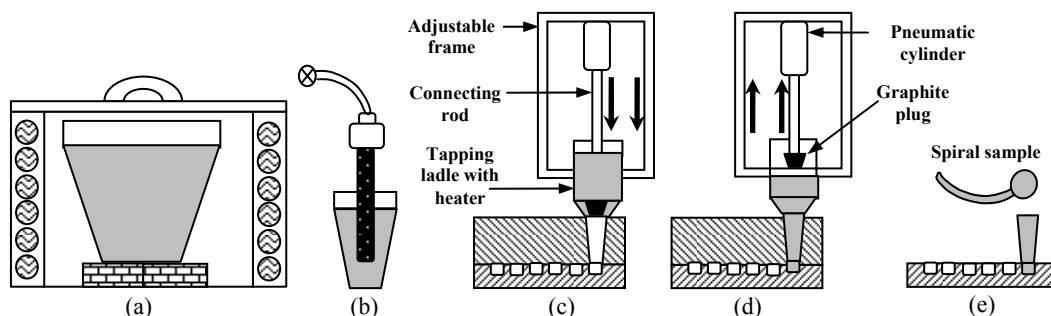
Schematic diagram of the spiral fluidity casting process (a) Melting, (b) GISS processing, (c) Equipment set up, (d) Bottom tapping, and (e) Mold shaking.
